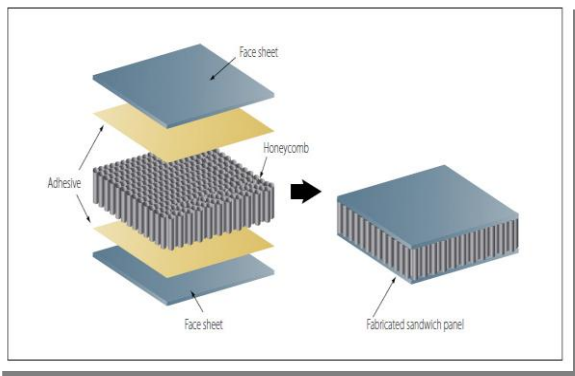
Sandwich Constructions with Honeycomb Core
